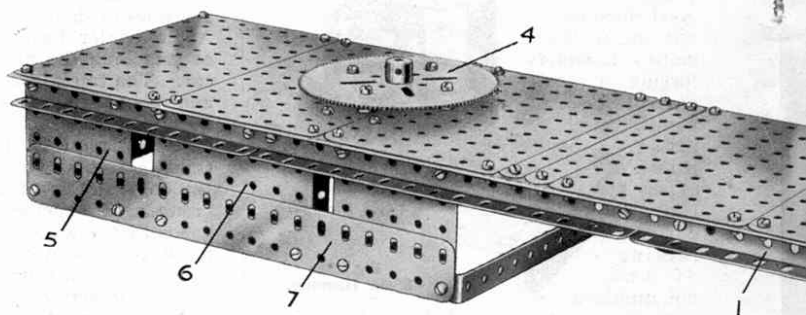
The Truck from the front. The Gear Wheel 4 forms the lower portion of the Ball Bearing.
